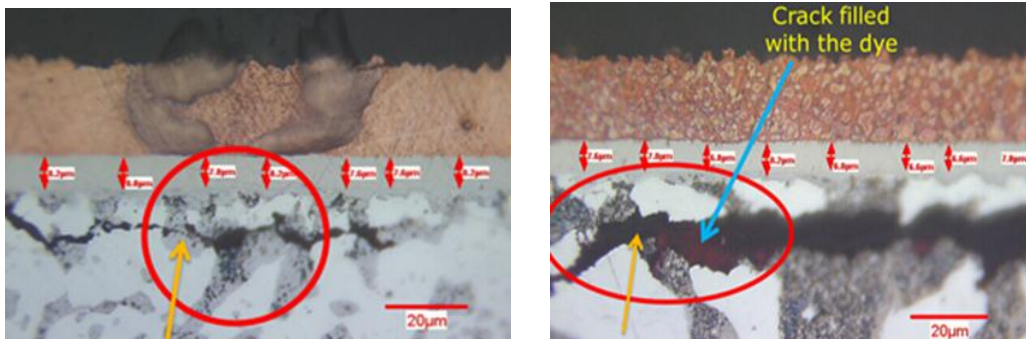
Transgranular crack in the package side (Sn37Pb (Board #9))
